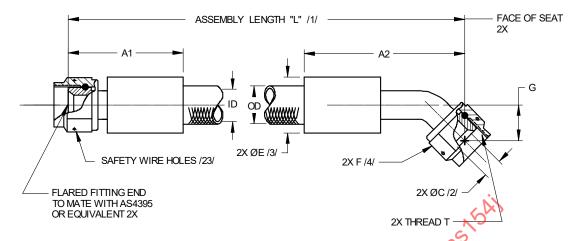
HOSE AND FITTING DIMENSIONS
